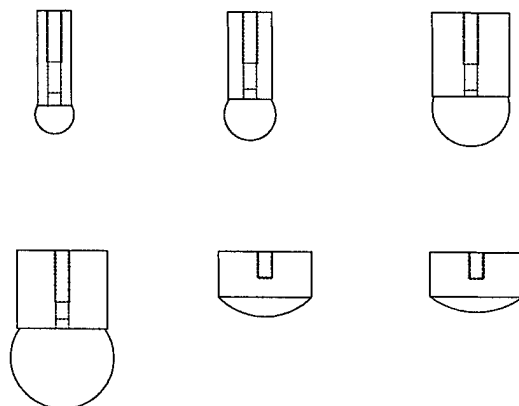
TYPICAL IMPACT TUPS USED WITH THE IMPACTOR ASSEMBLY
